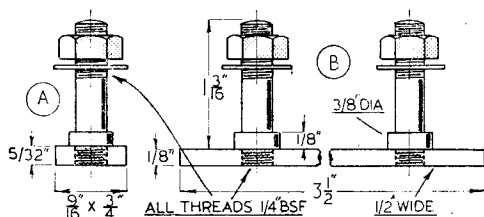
Showing construction of a built-up T-bolt—"A"; and a bolting strip—"B"
